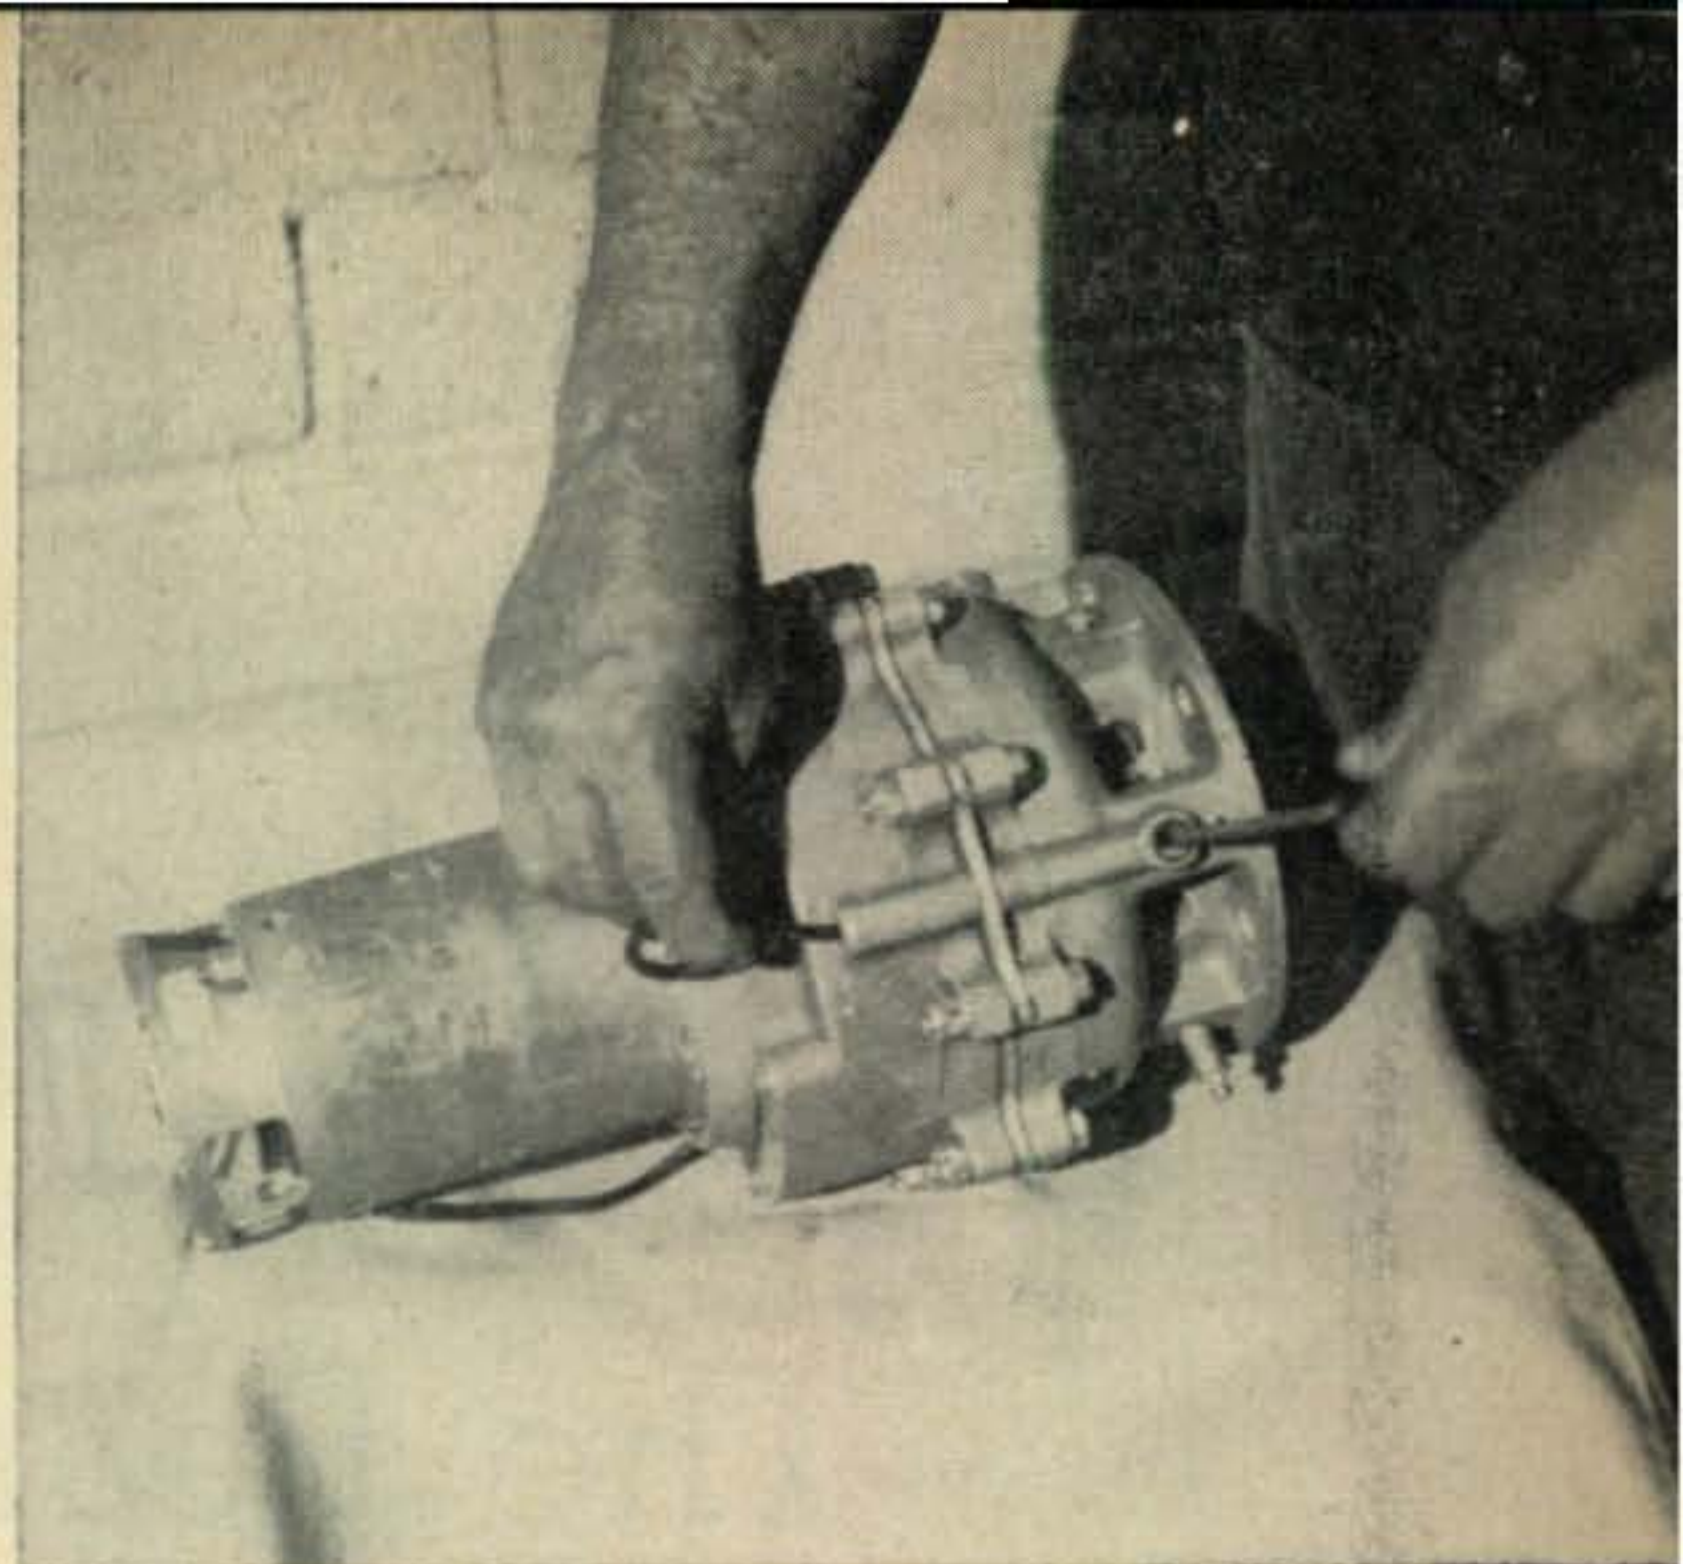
View showing how to remove wires so that 25v ac can be connected.
